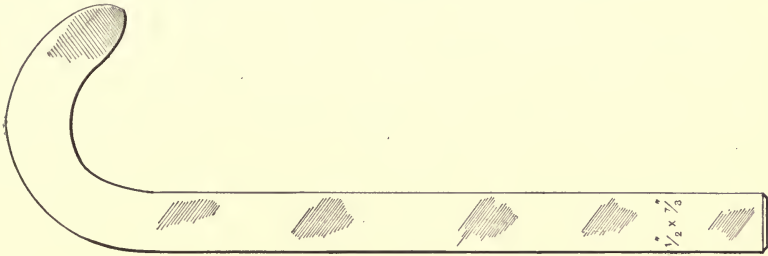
TOOL FOR TURNING FLY WHEEL.
